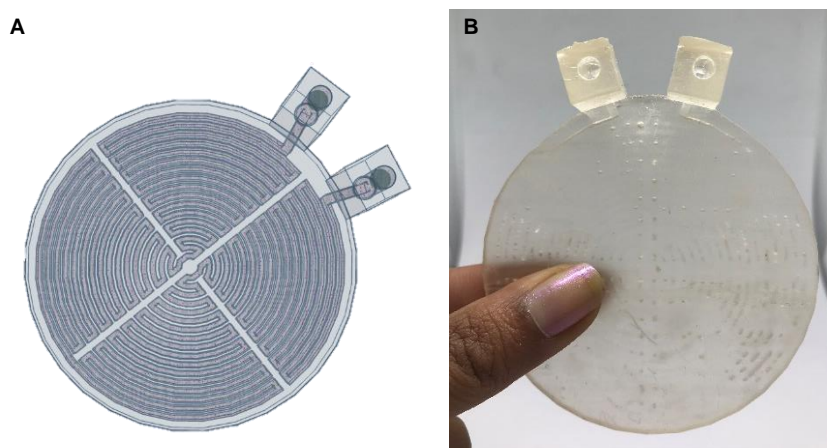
A) CAD drawing of circular hotplate reactor design 3; B) Printed circular hotplate reactor design 3 showing over-polymerization.
